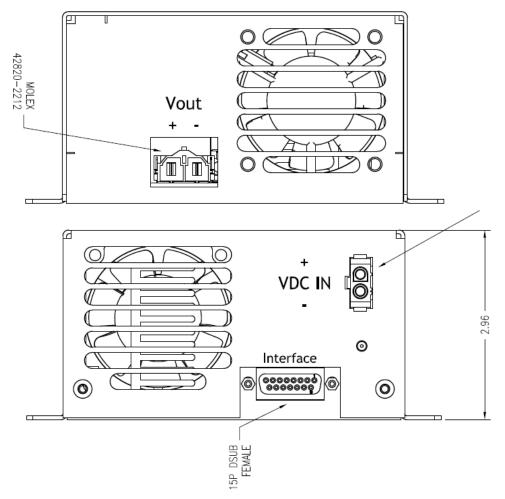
, HPP-750 Mechanical Outline and Connections, Front and Back View
